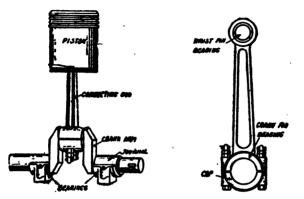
ONE-THROW CRANK FIG. 6.—CONNECTING ROD SHAFT.
